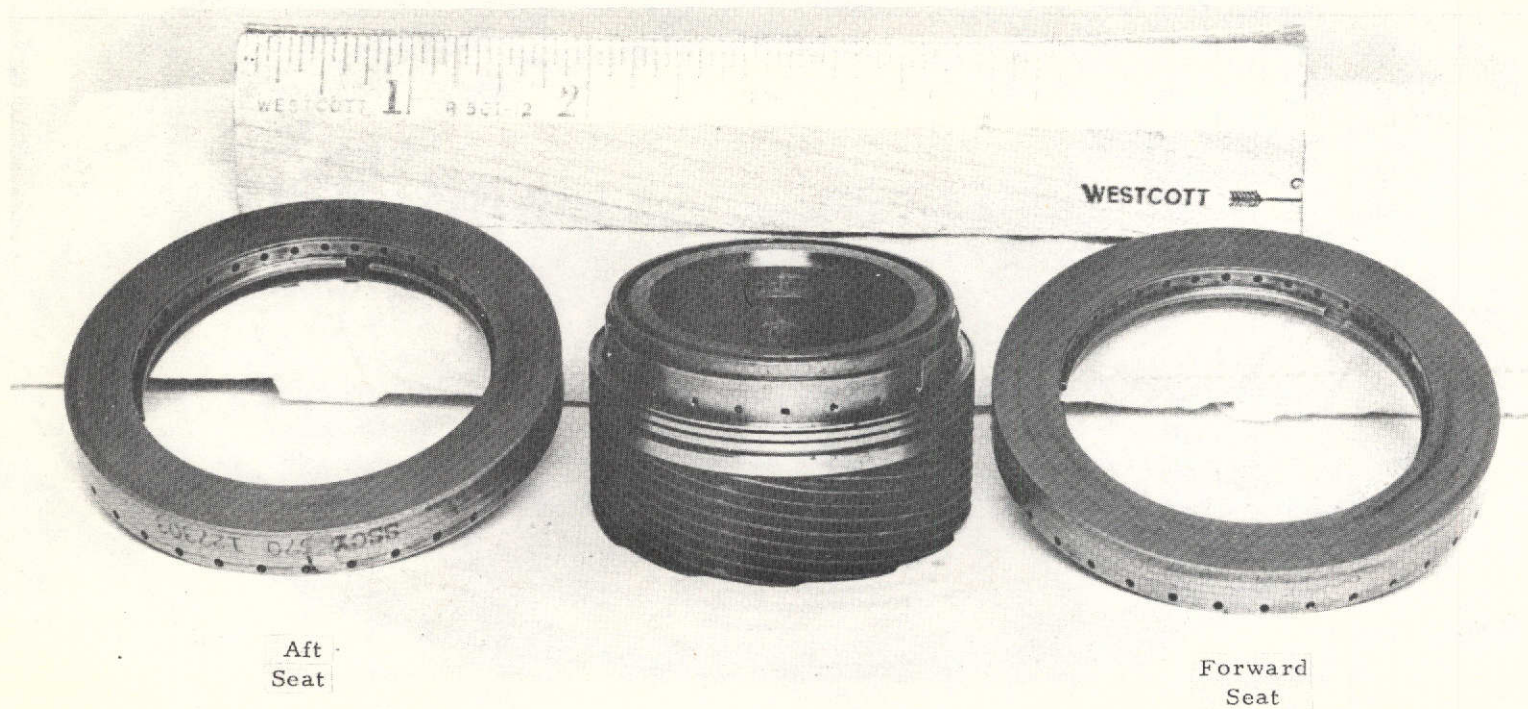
Seal Seats and Aft Rotating Windback After Sand and Dust Test IV.
